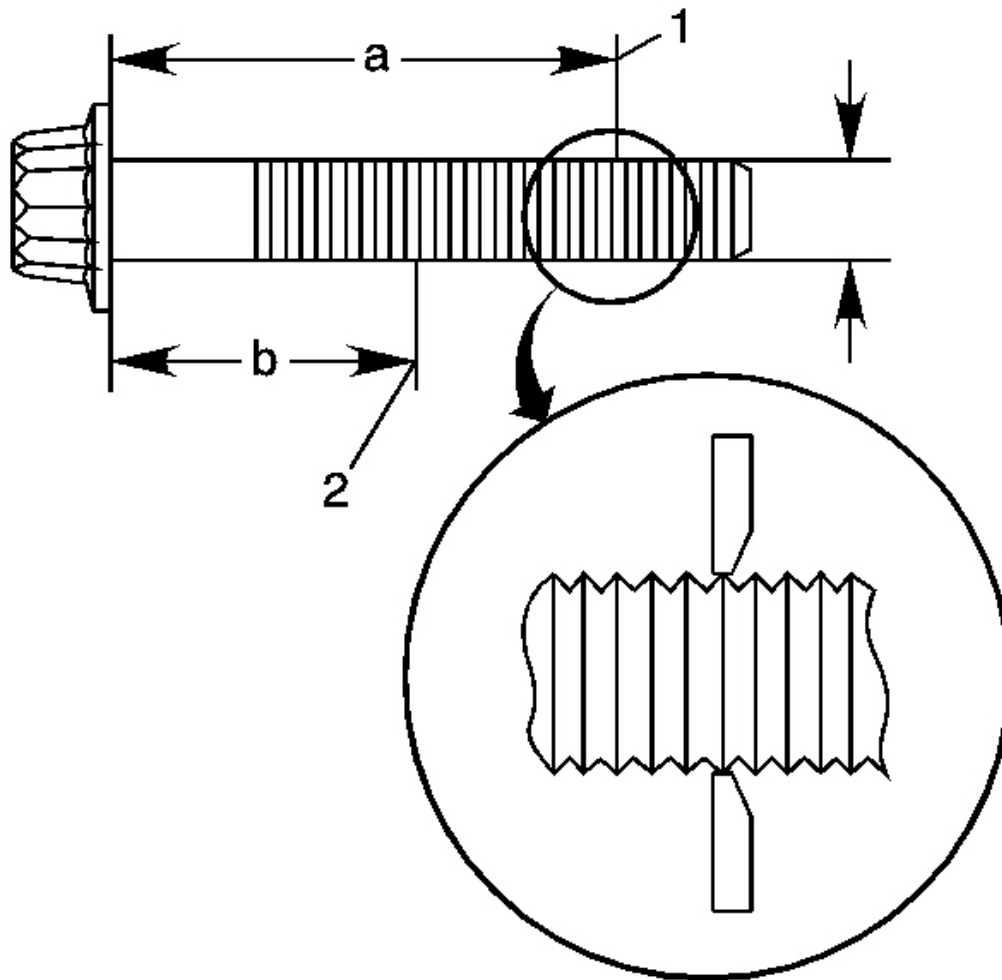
Measuring Diameter Of Connecting Rod Bolt
